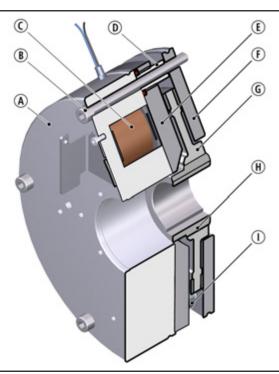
Layout of an INTORQ BFK464-ppR spring-applied brake Complete stator + rotor + flange
